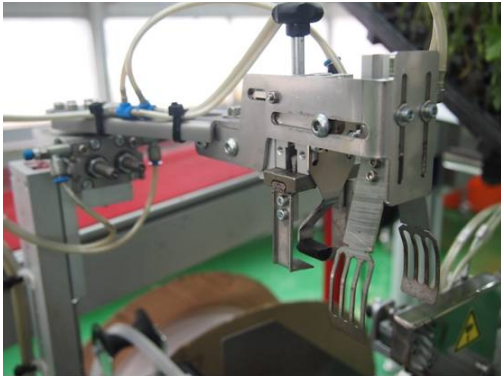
Grafting tube supply and cut mechanism Fig. 7. Tube supply and grafting mechanism
